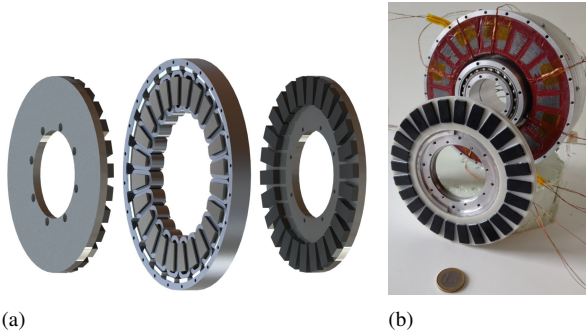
(a) CAD drawing of the test case YASA AFPMSM (b) Assembled prototype stator and rotor, both enamelled copper wire and anodised aluminium foil stator look identical after epoxy impregnation
